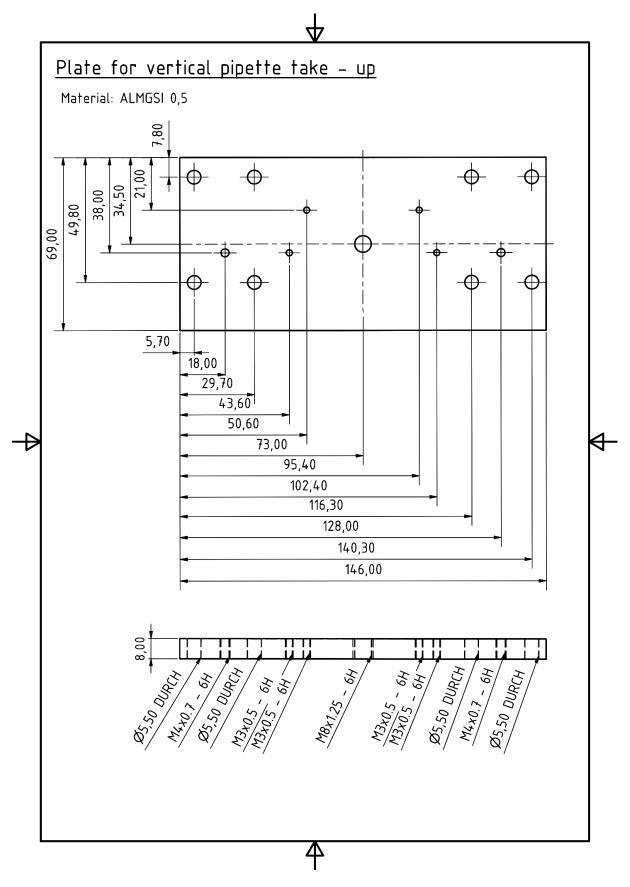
Fig B: Technical drawing of the pipette receptacle. The receptacle was custom-made from 8 mm aluminum sheet material. All dimensions are provided in mm.
